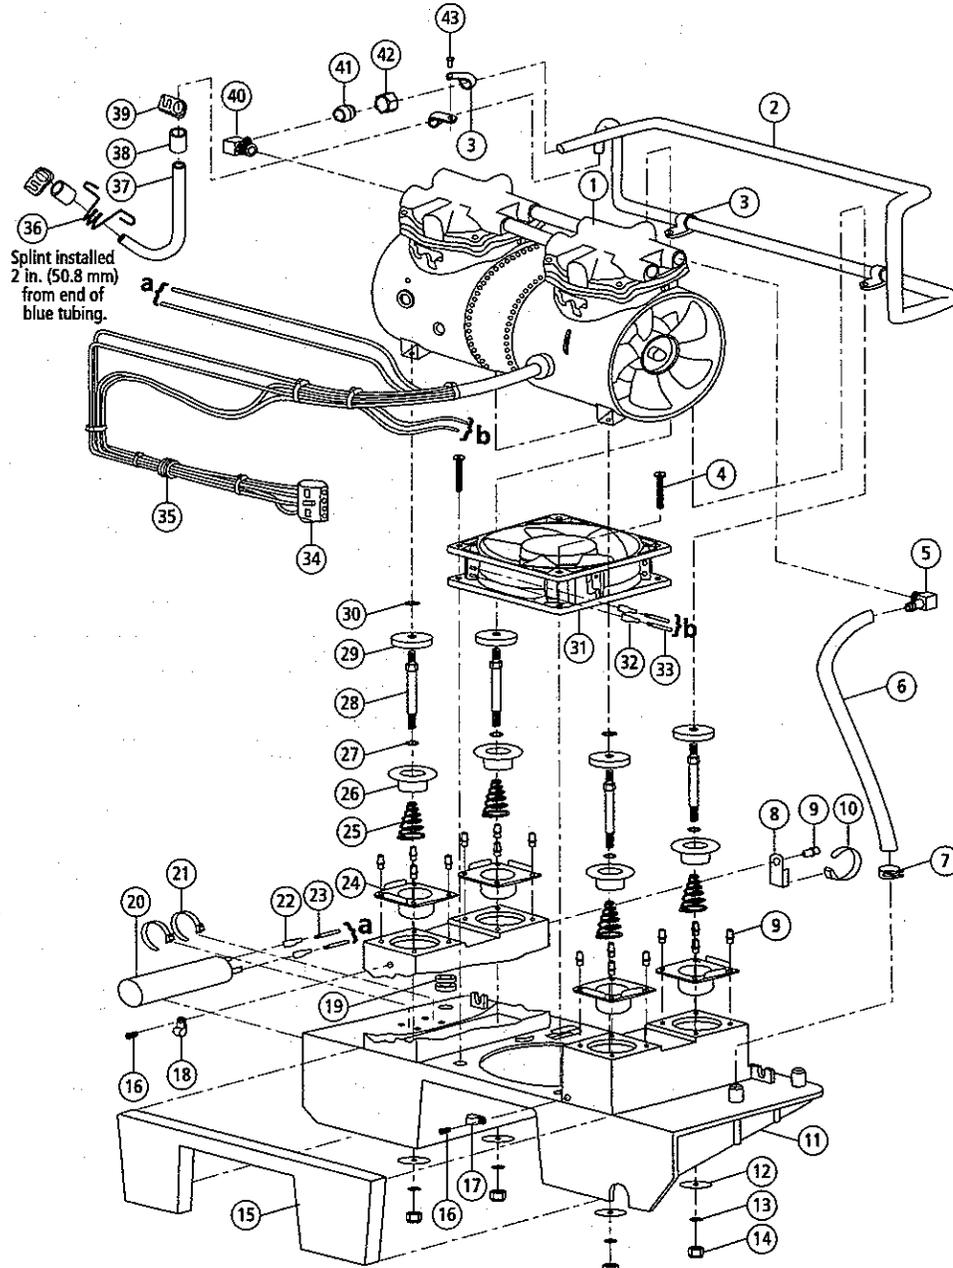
2639 Thomas Compressor Platform Assembly
